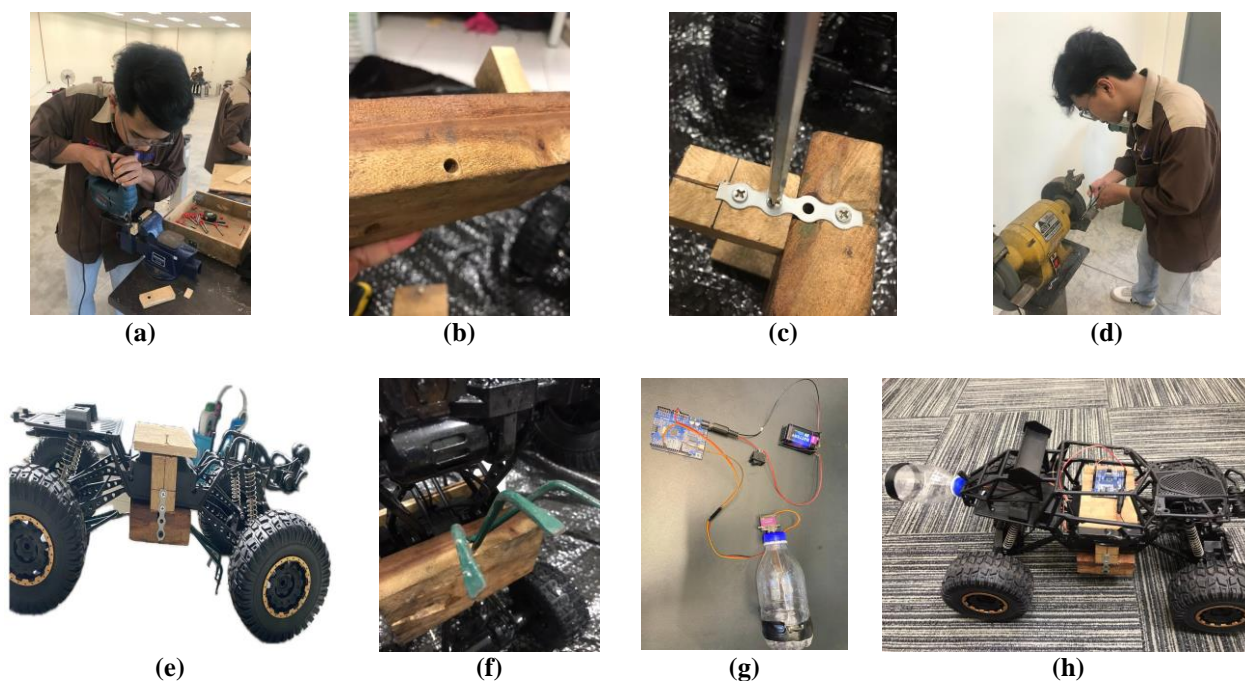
Step to develop the Automatic Seed Sowing (a) Saw a block of wood; (b) Drill a hole; (c) Tie using a universal bracket and screw it; (d) Sharpened three-pronged hoe; (e) Apply wooden block to RC car body; (f) Insert three-pronged hoe to the hole; (g) Arduino UNO circuit setup design; (h) Complete Automatic Seed Sowing
